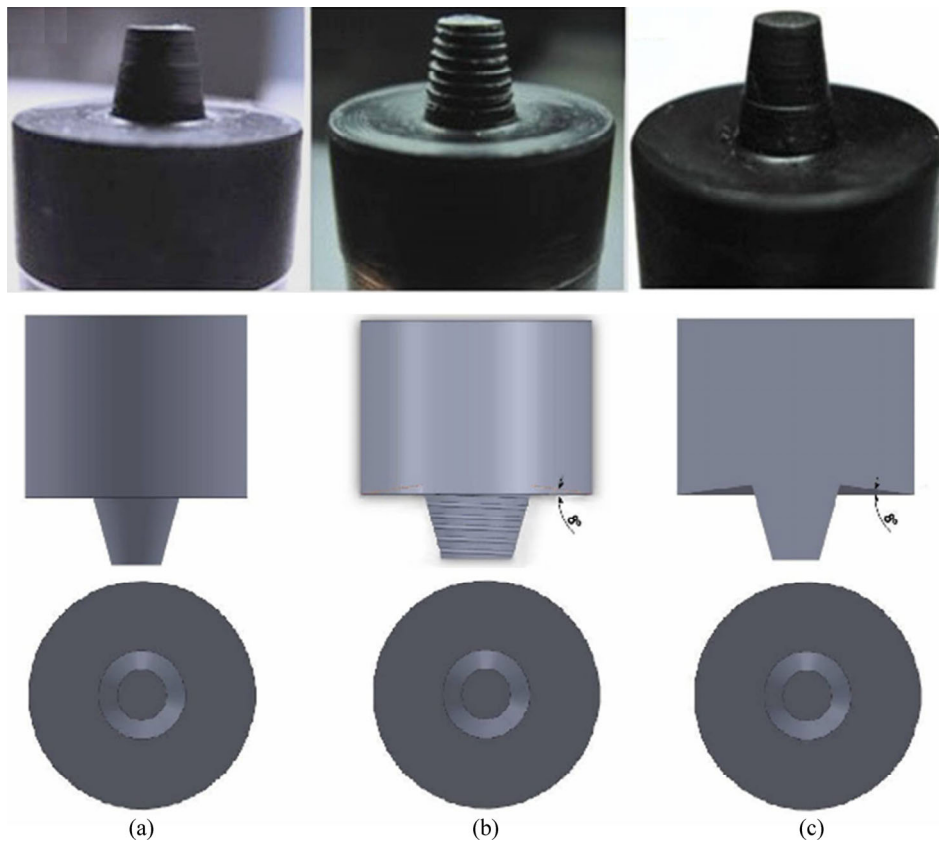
Initial parts of tool in friction stir welding [12, 16]
